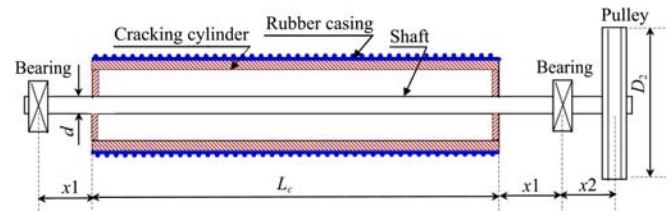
Sectional diagram showing the cracking cylinder and pulley were fixed on the shaft
